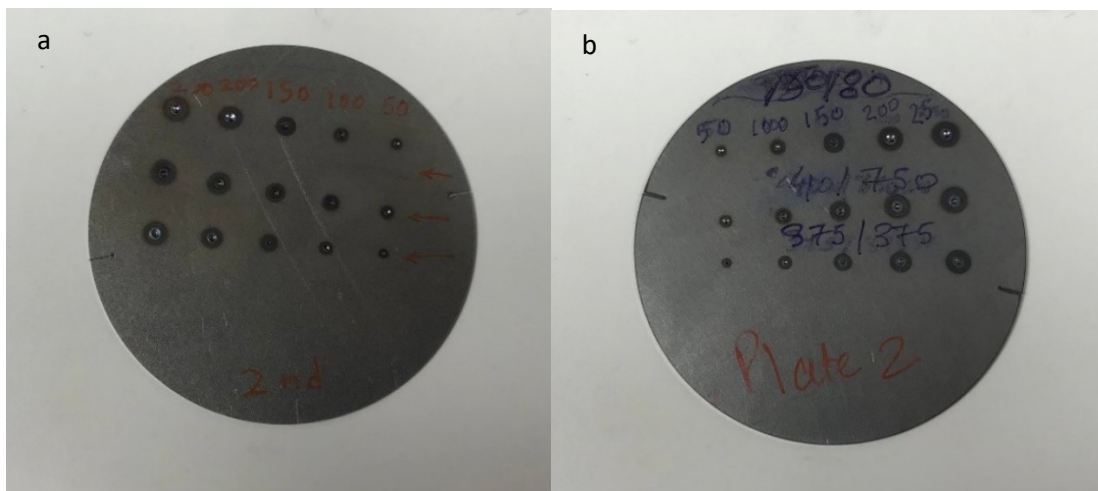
Second run Spot Welds on MS (a)front side (b) back side
